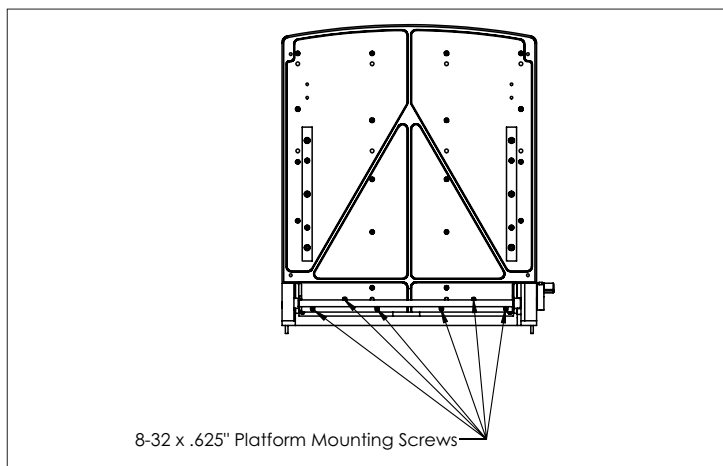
Figure B. The six mounting screws must be removed from the receiver before the platform can be removed.
